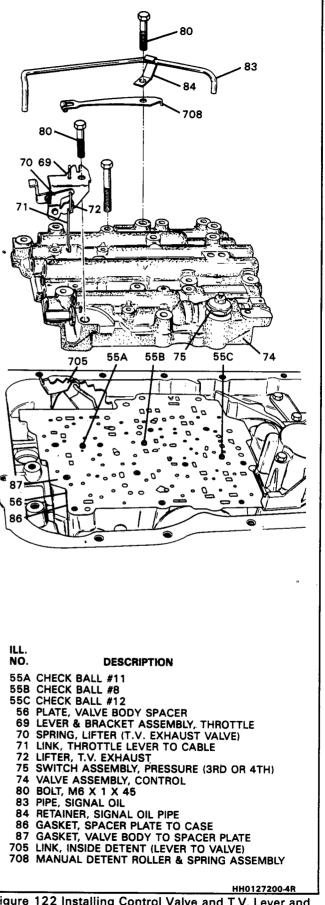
Installing Control Valve and T.V. Lever and Bracket Assemblies
